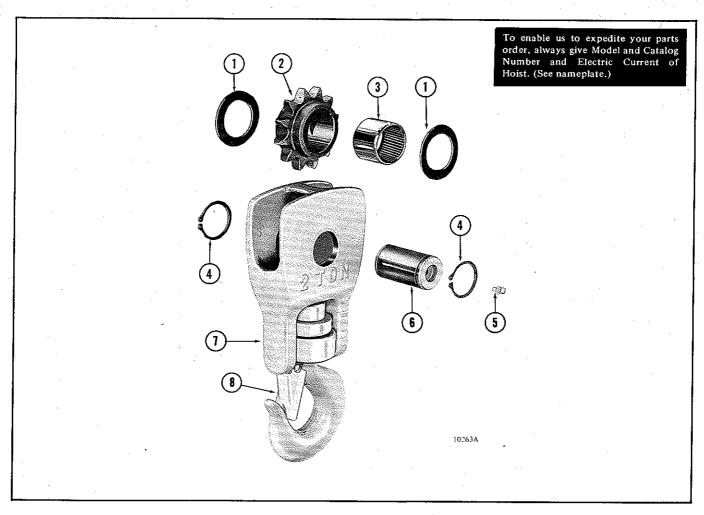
2 TON LOWER BLOCK ASSEMBLY - (Roller Chain Model Hoists)
